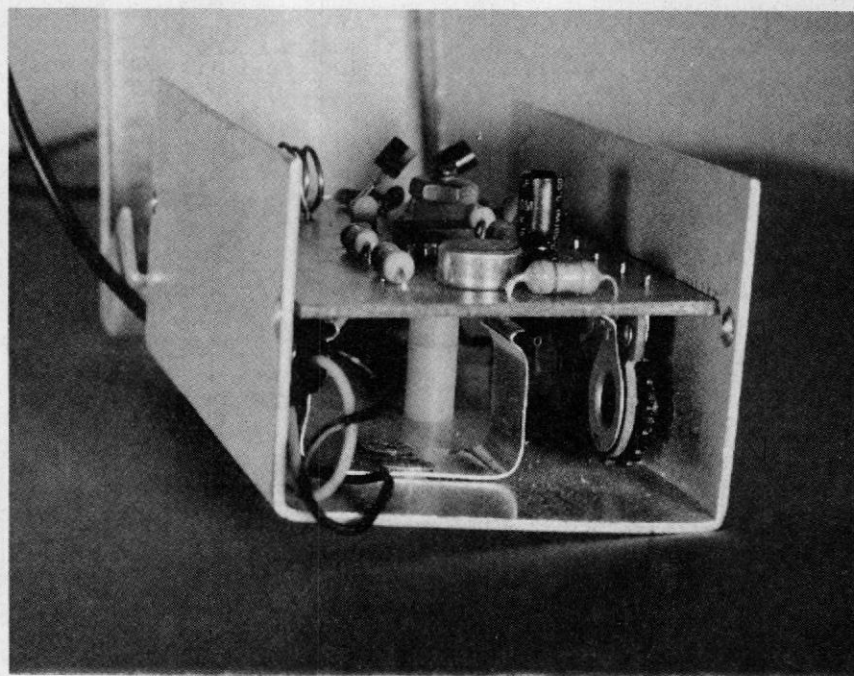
TO USE THE METAL CASE, the PC board must be cut between the two "CUT A" points indicated in Fig. 6, and the potentiometers must be mounted on the underside of the board.
